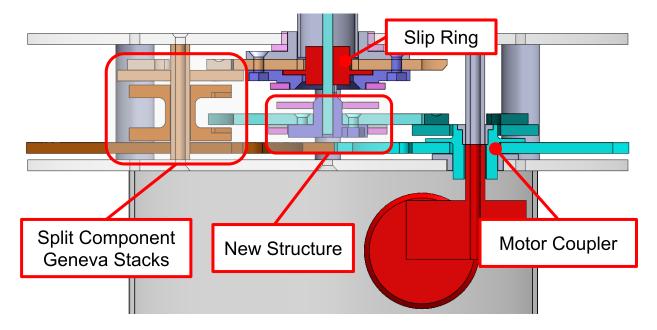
Cross section of the final coaxial Geneva mechanism design. Callouts detail new CAD additions. Additional views and labels may be found in Appendix E.
